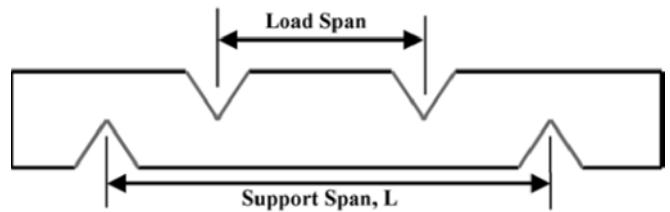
Fixture Used to Align Loading Noses and Supports
